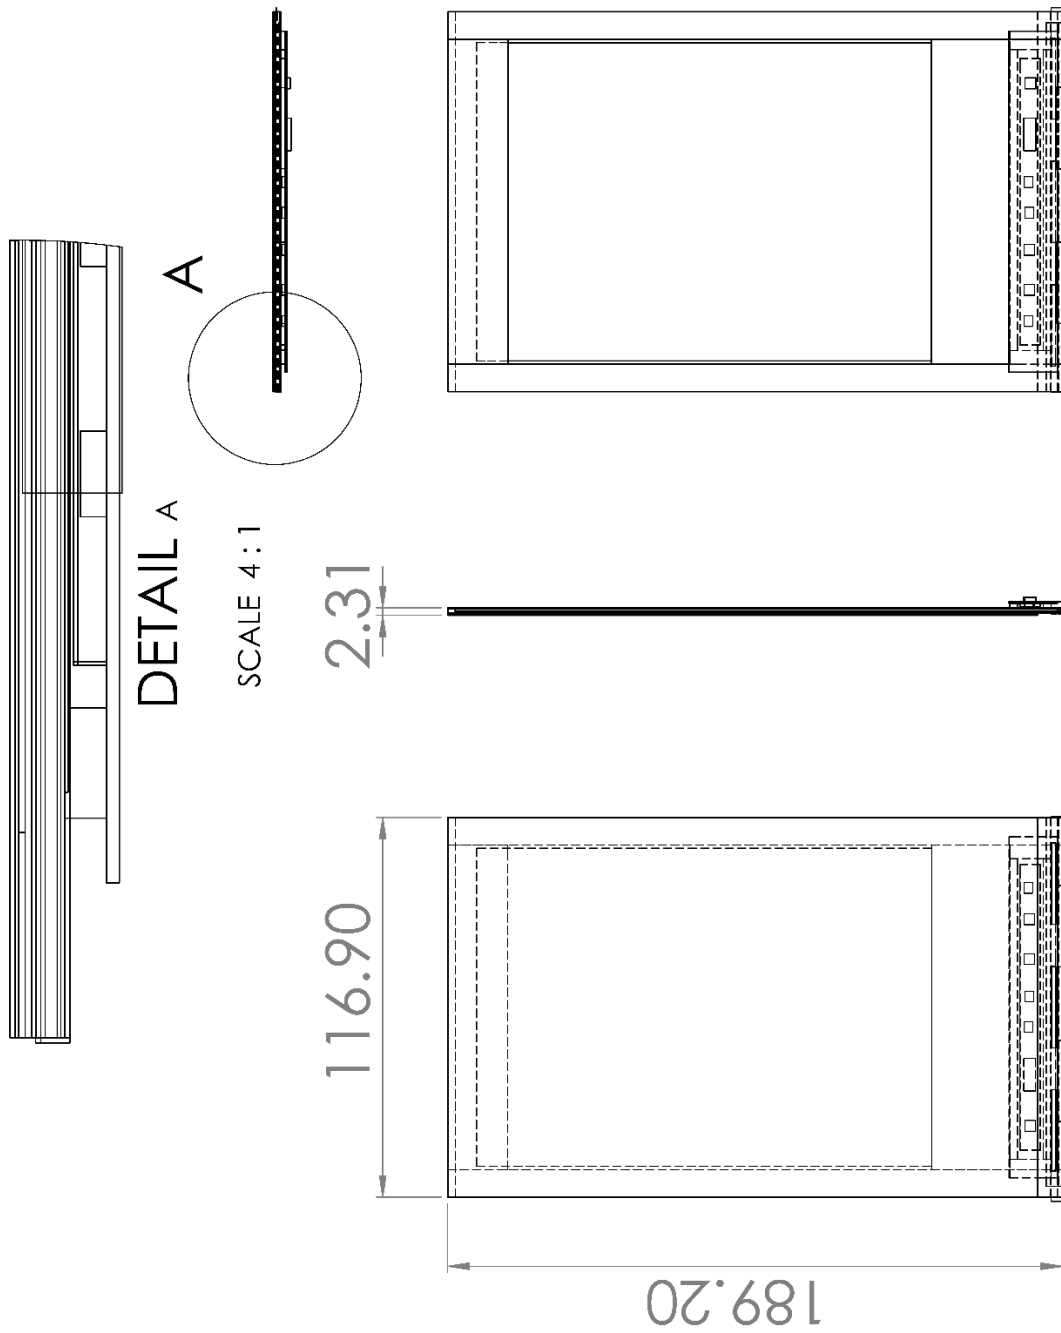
Dimensioned drawing of the display assembly, dimensions given in mm
